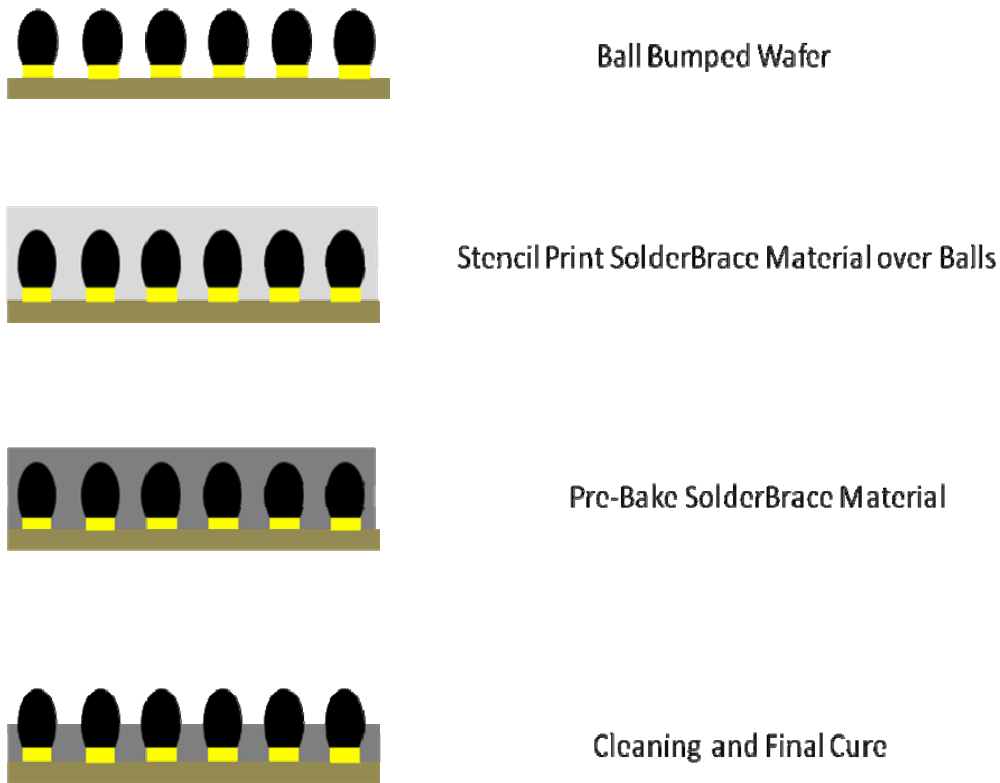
Application of SolderBrace Material by maskless printing over balled wafer
